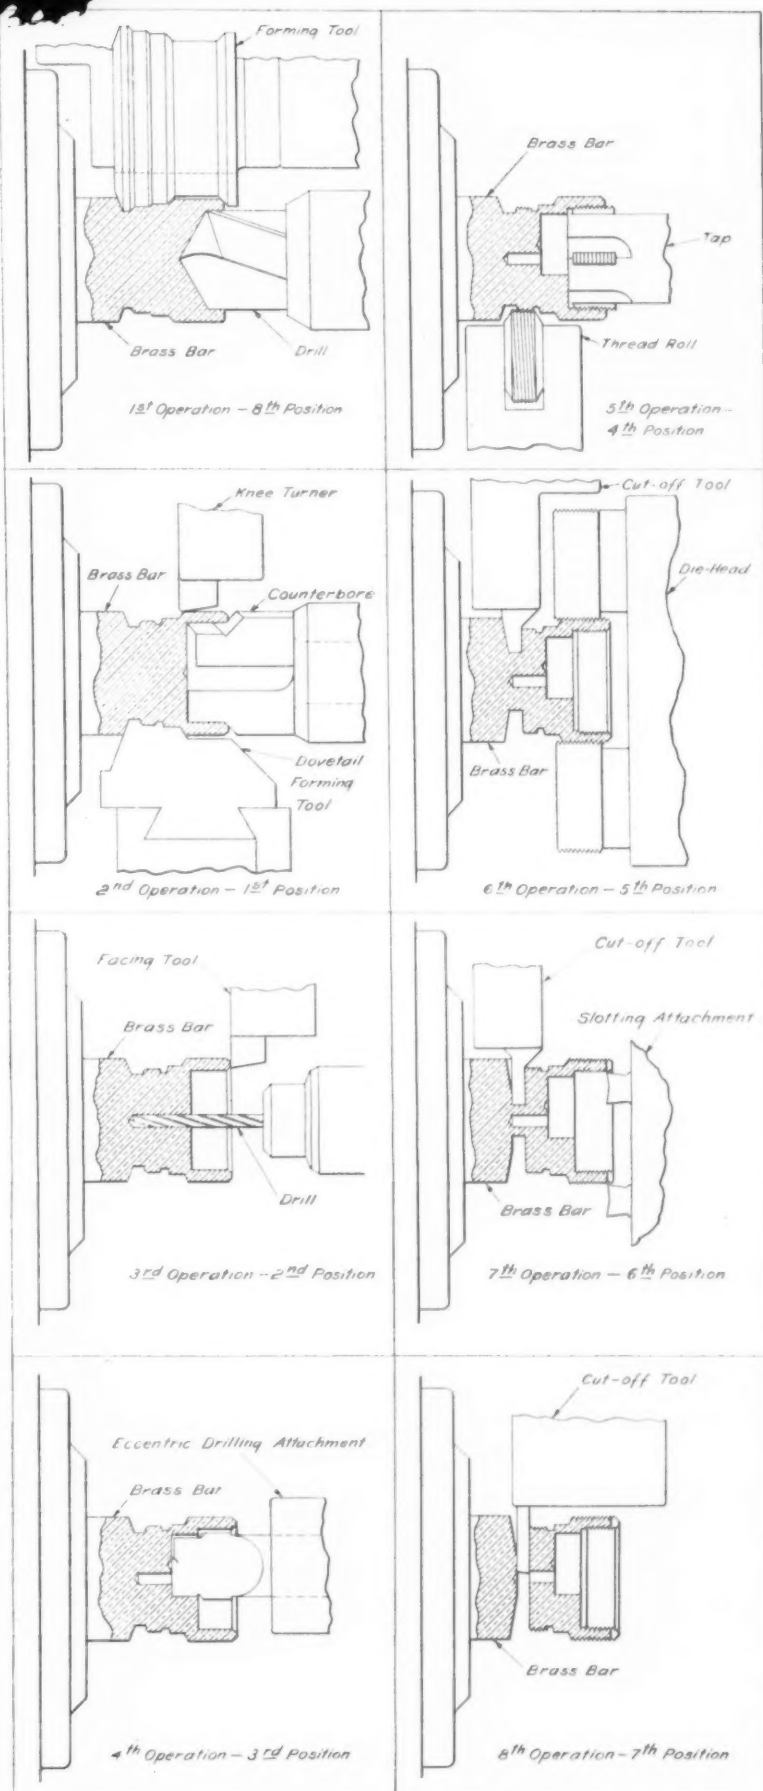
Diagram of Tooling Arrangement of the Acme-Gridley Machine Shown in Figs. 1 and 2
